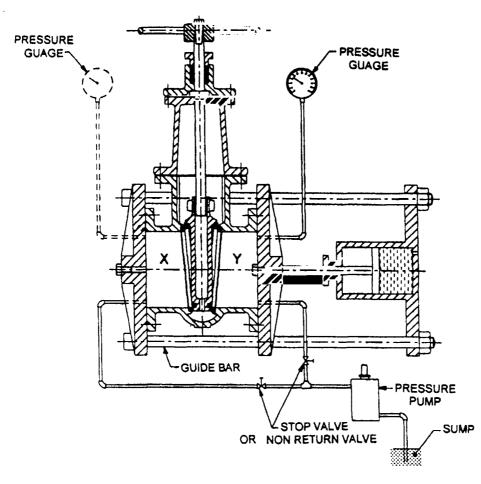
TYPICAL VALVE TESTING ARRANGEMENT FOR CLOSED-END TEST
